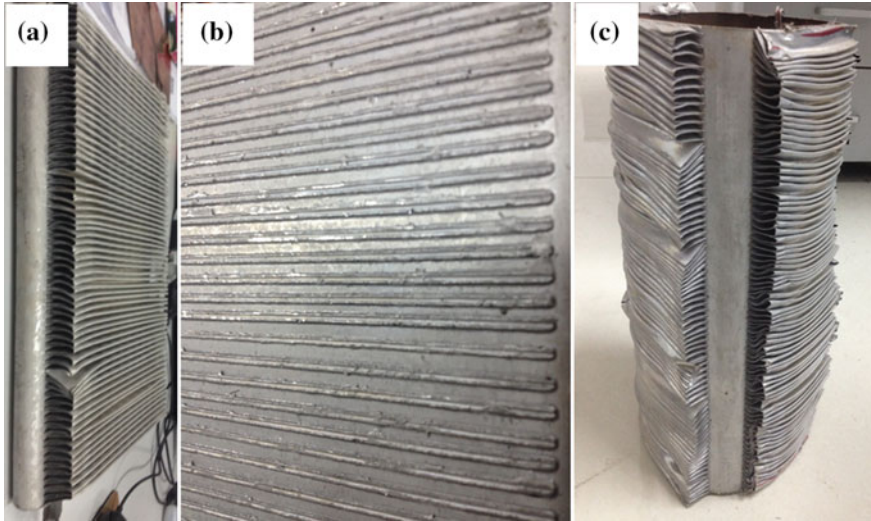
Samples of air cooled island brazed by aluminum clad steel plate with the Al alloy fins. a the profile picture; b the interface between clad steel plate with the Al alloy fins; c the blasting samples of air cooled island
